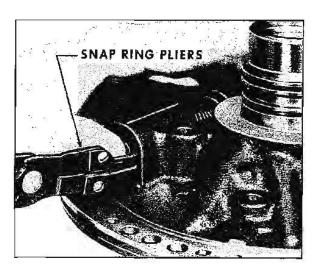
B-101 Removing Boost Valve Sleeve Snap Ring
